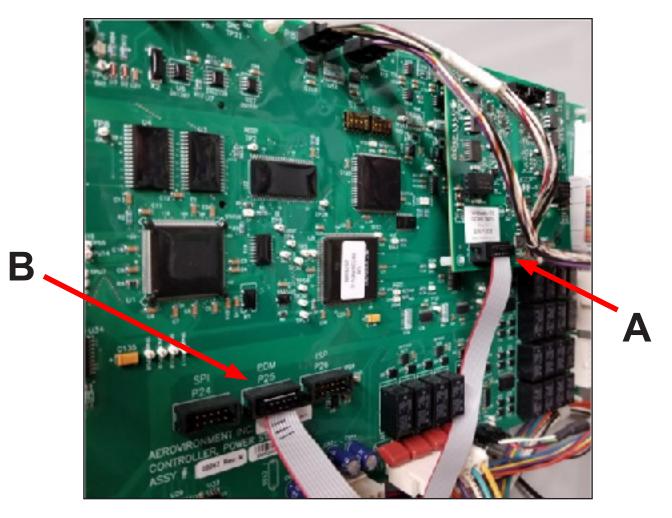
GCAN Board Connected to the 5VDC Supply at Port 25 on the GSE Control Board with the Ribbon Cable
